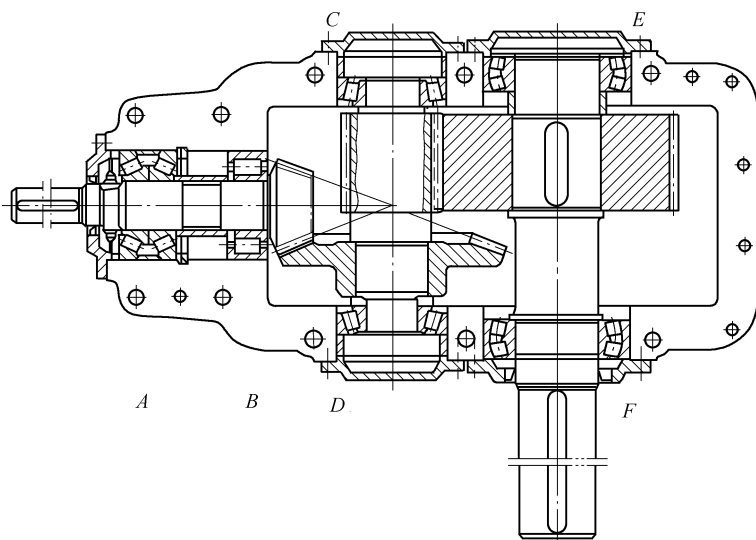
Bearing arrangement for two stage taper-cylindrical gear transmission
